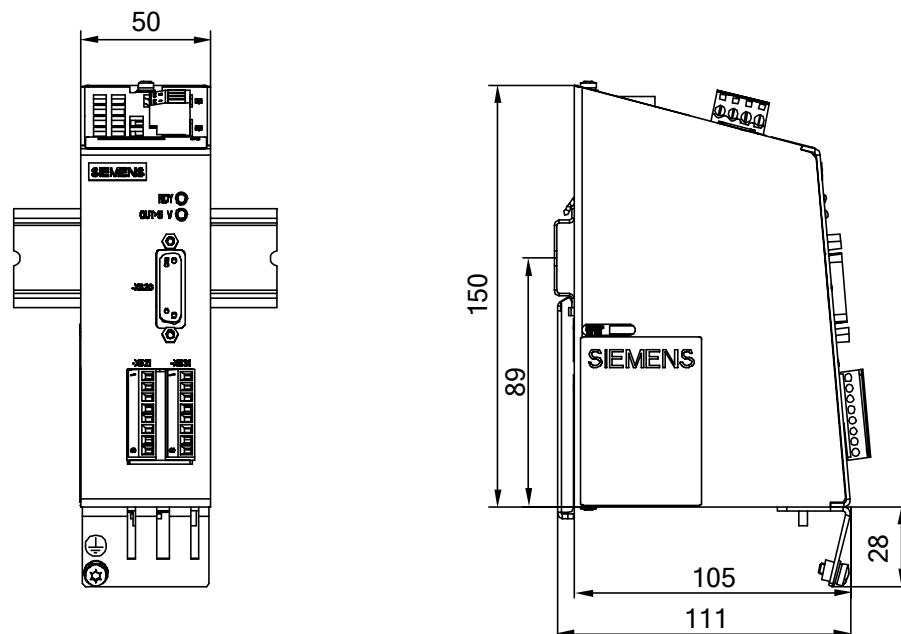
Dimension drawing: SMC30 Sensor Module
